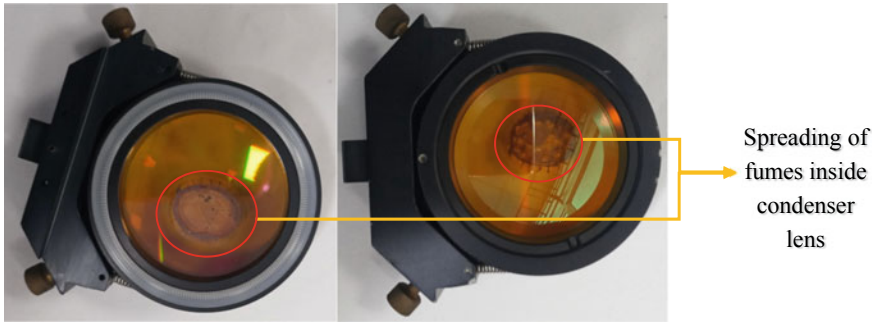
Damage in condenser lens of 2.5 kW CO₂ laser machine due to sample reflections during scanning and nonlinear uneven surface profile of workpieces
